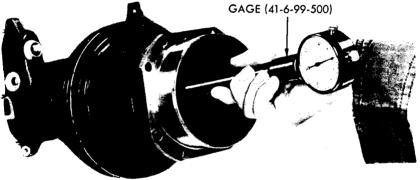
Checking Cylinder Bore for Wear RA PD 336200
